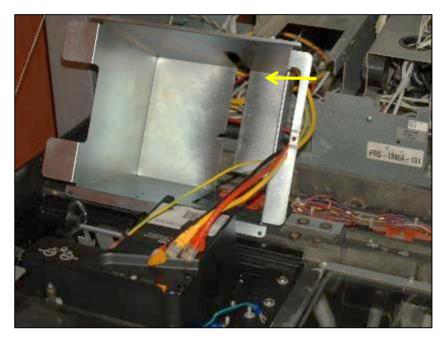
Draw cables through the slot on the right hand side of the Cover.
